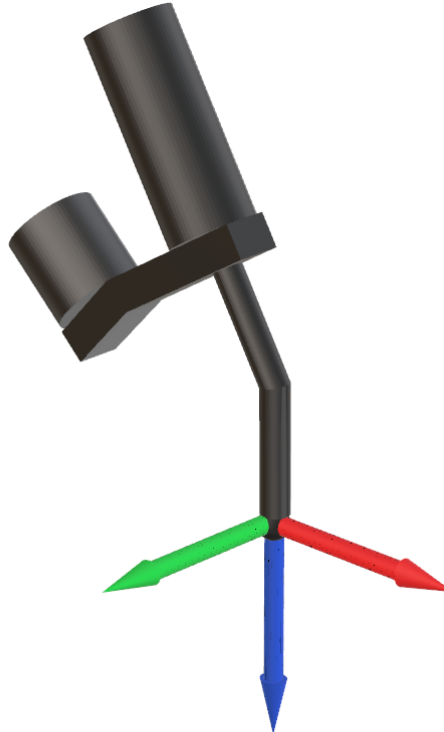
The welding torch with its frame. (Tool frame.)
